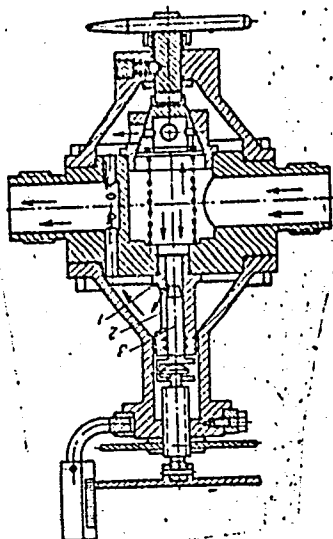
1 - cylindrical collar; 2 - slit; 3 - cylindrical plug
